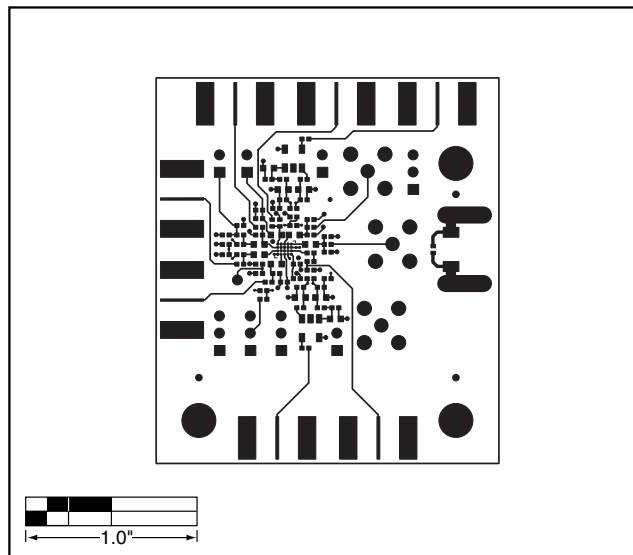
MAX2385/MAX2386 EV Kit PC Board Layout—Component Side
